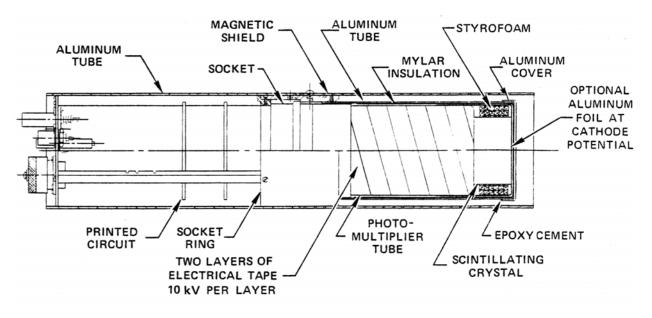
Cutaway Drawing of PM - Scintillator Mounting.
